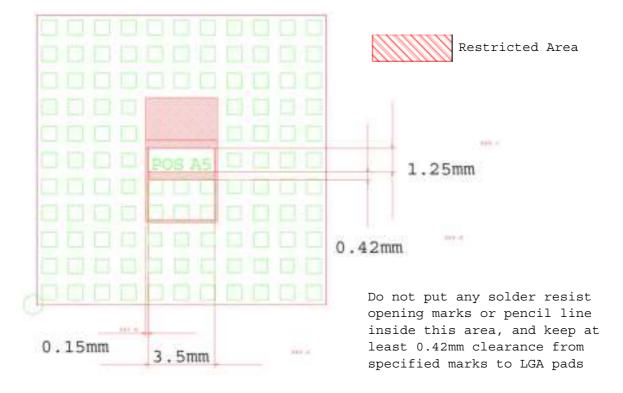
Dimensions of area for possible markings TX62-W (bottom view)
